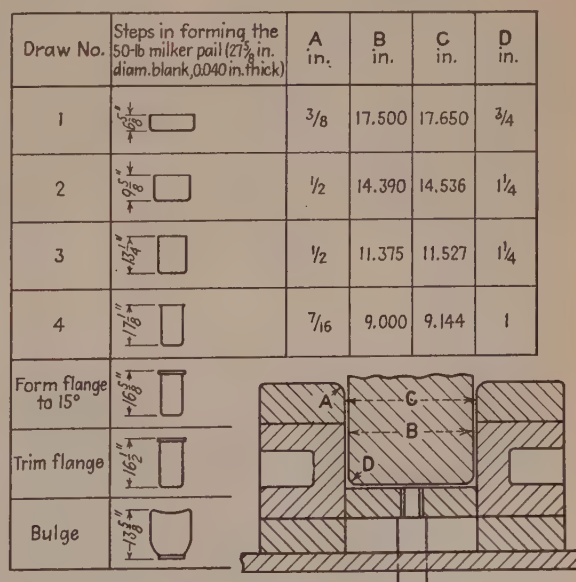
Draw die details, as well as detailed data on the 50-lb pail after each operation, are shown here. A 27 $\frac{5}{8}$ in. diam. blank, 0.040 in. thick, is used.
